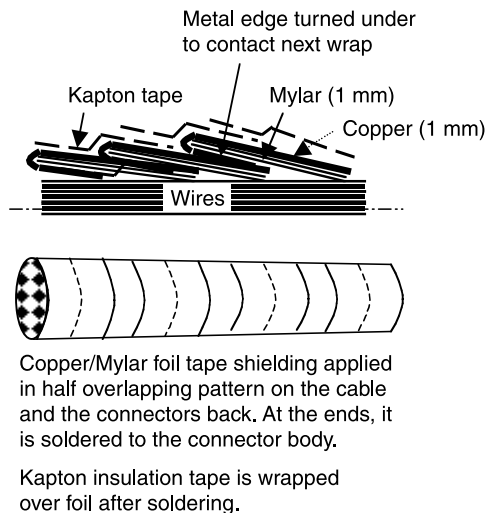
The cable shielding method using metal backed insulating tape.
